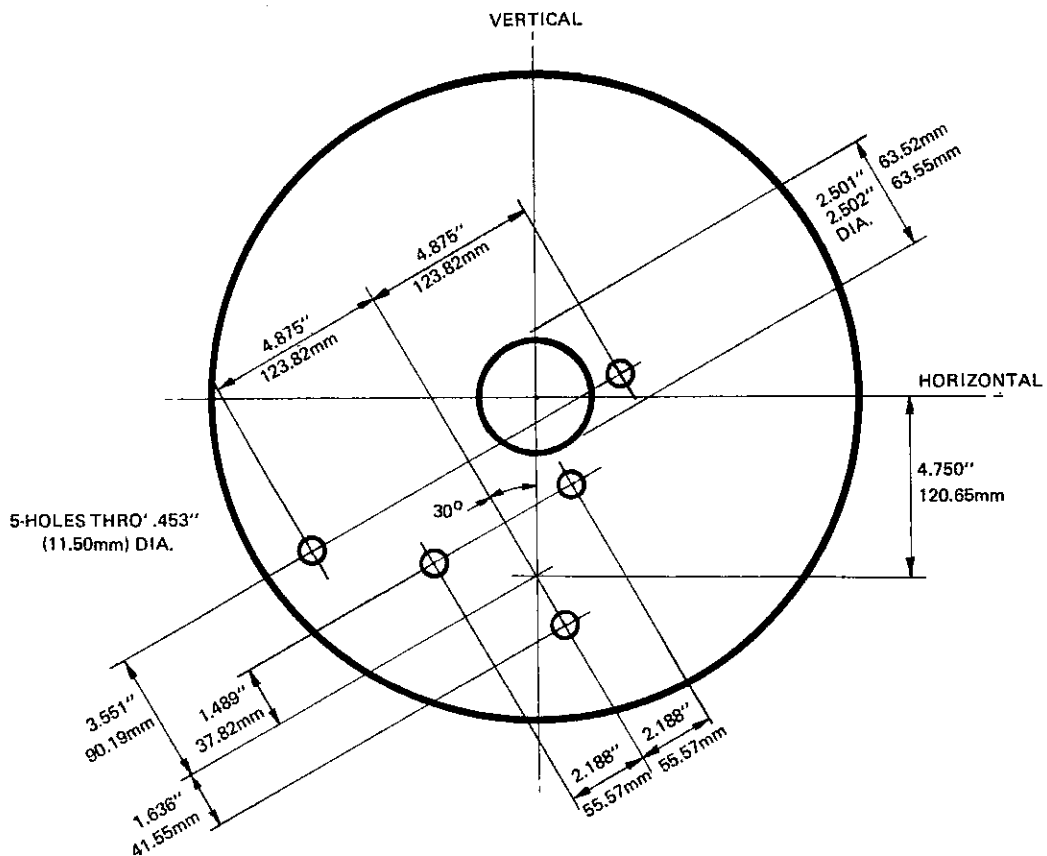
Adapter Flange drilling details (Gearbox - adaptor)
